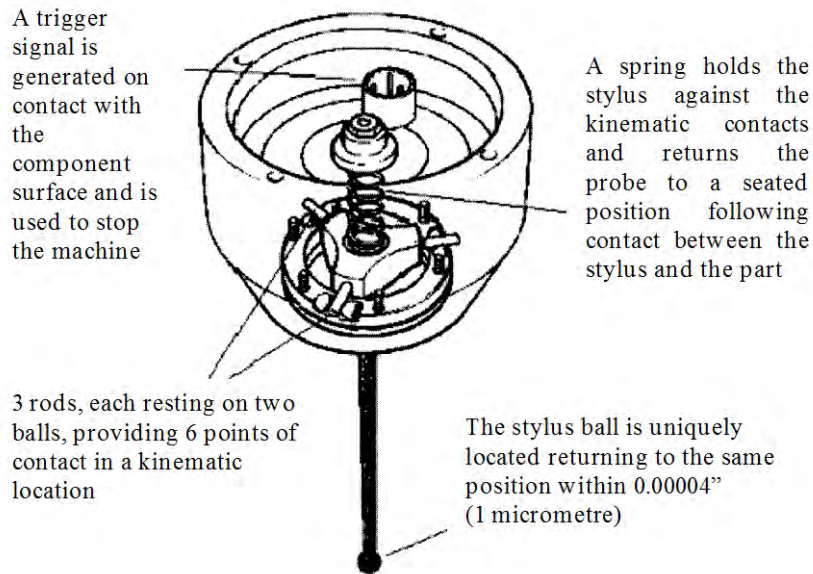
Cut-away drawing of a touch trigger probe (© Renishaw 1987)
